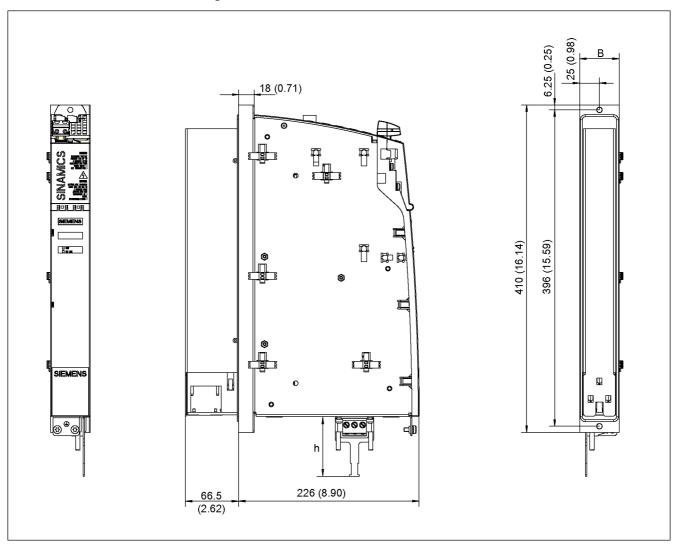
Dimension drawing of Smart Line Module (5 kW and 10 kW) with external air cooling
